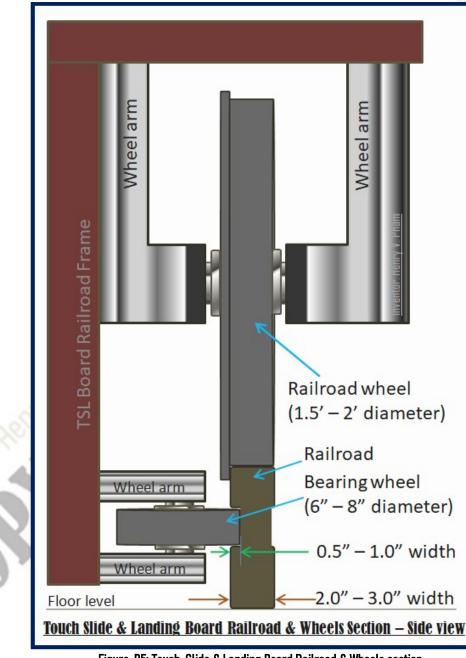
Touch-Slide & Landing Board Railroad & Wheels section
